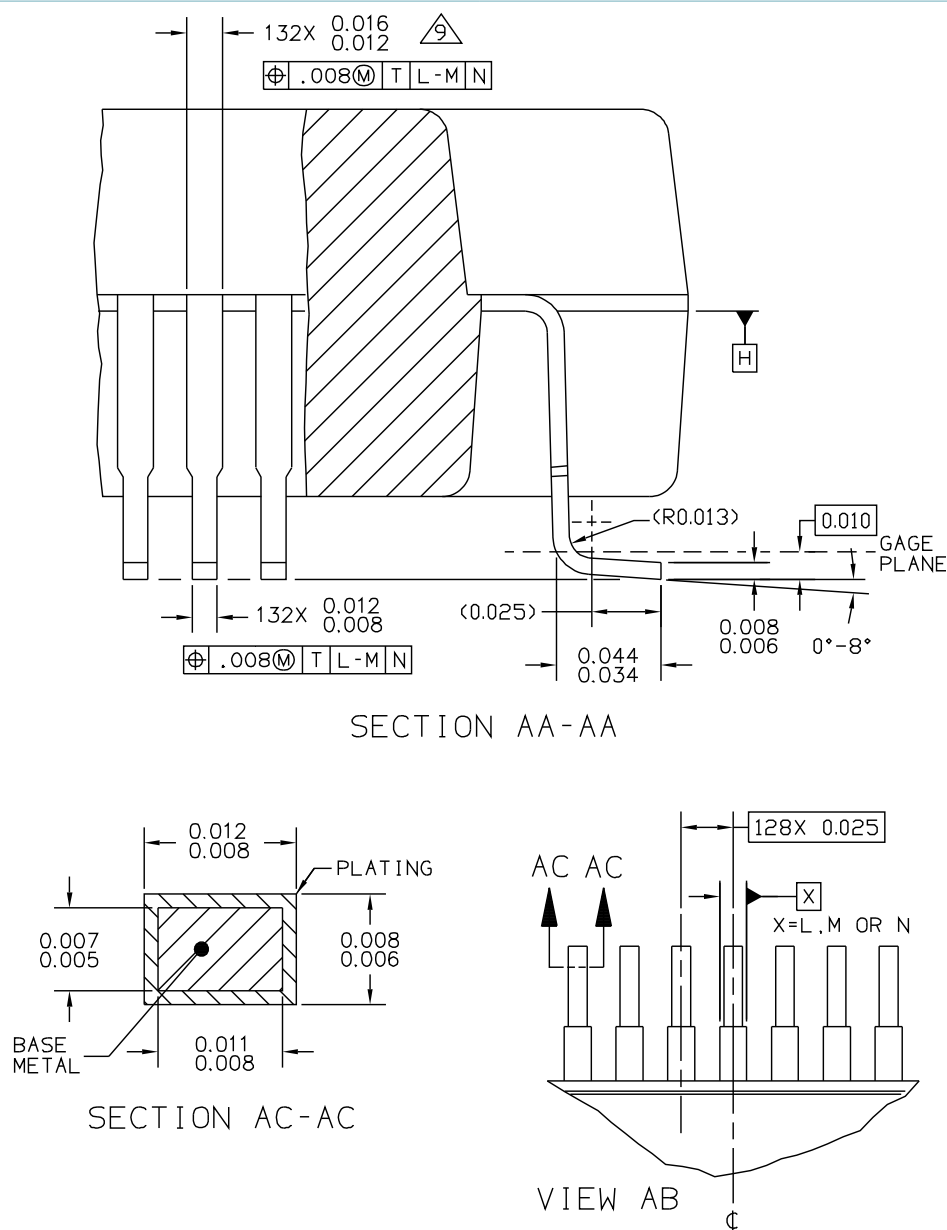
Package outline dt1 QFP132 (SOT1695-1)
